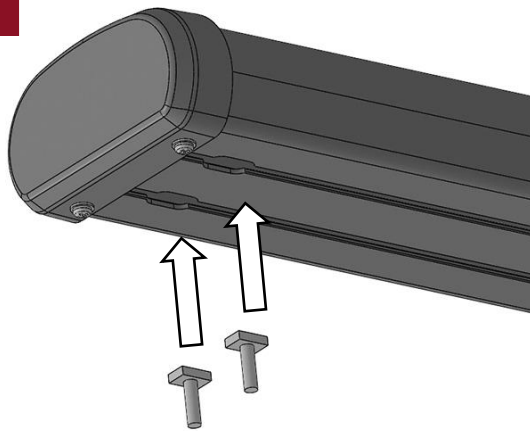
Passenger/Right rear mounting location (Model with threaded inset shown)
